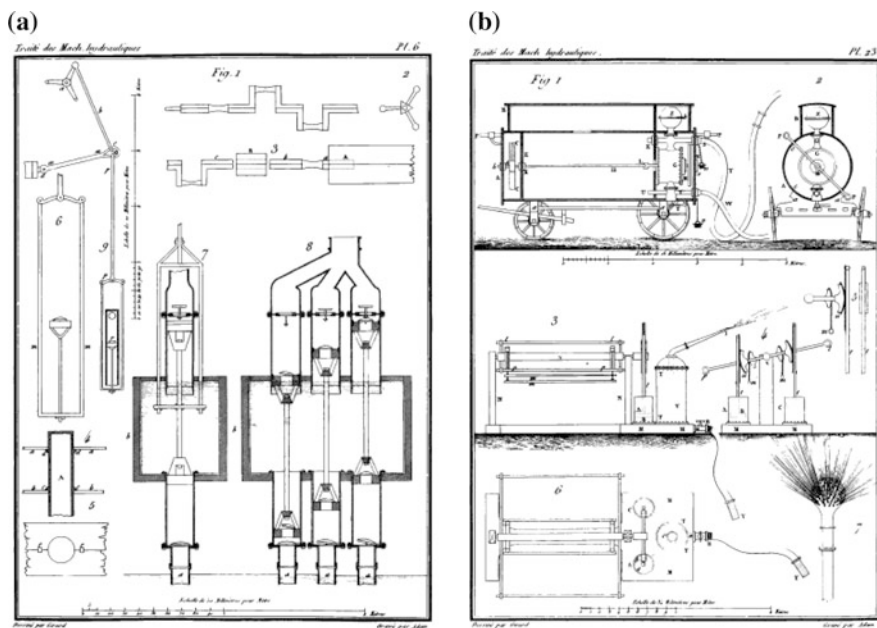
Examples of machine drawings in the book on Hydraulic Machines by Borgnis (1819a): a composed pumps; b fire-fighting applications
